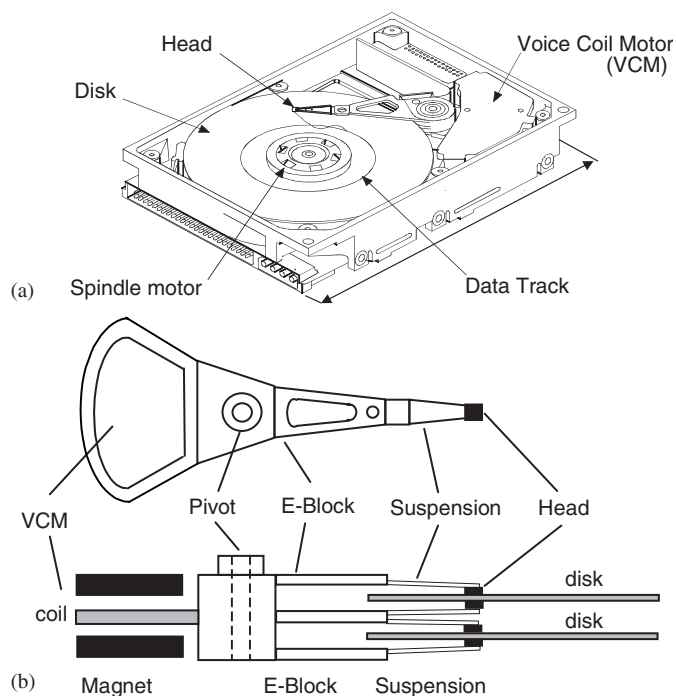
(a) Conventional disk drive configuration; (b) conventional disk drive servo assembly.
